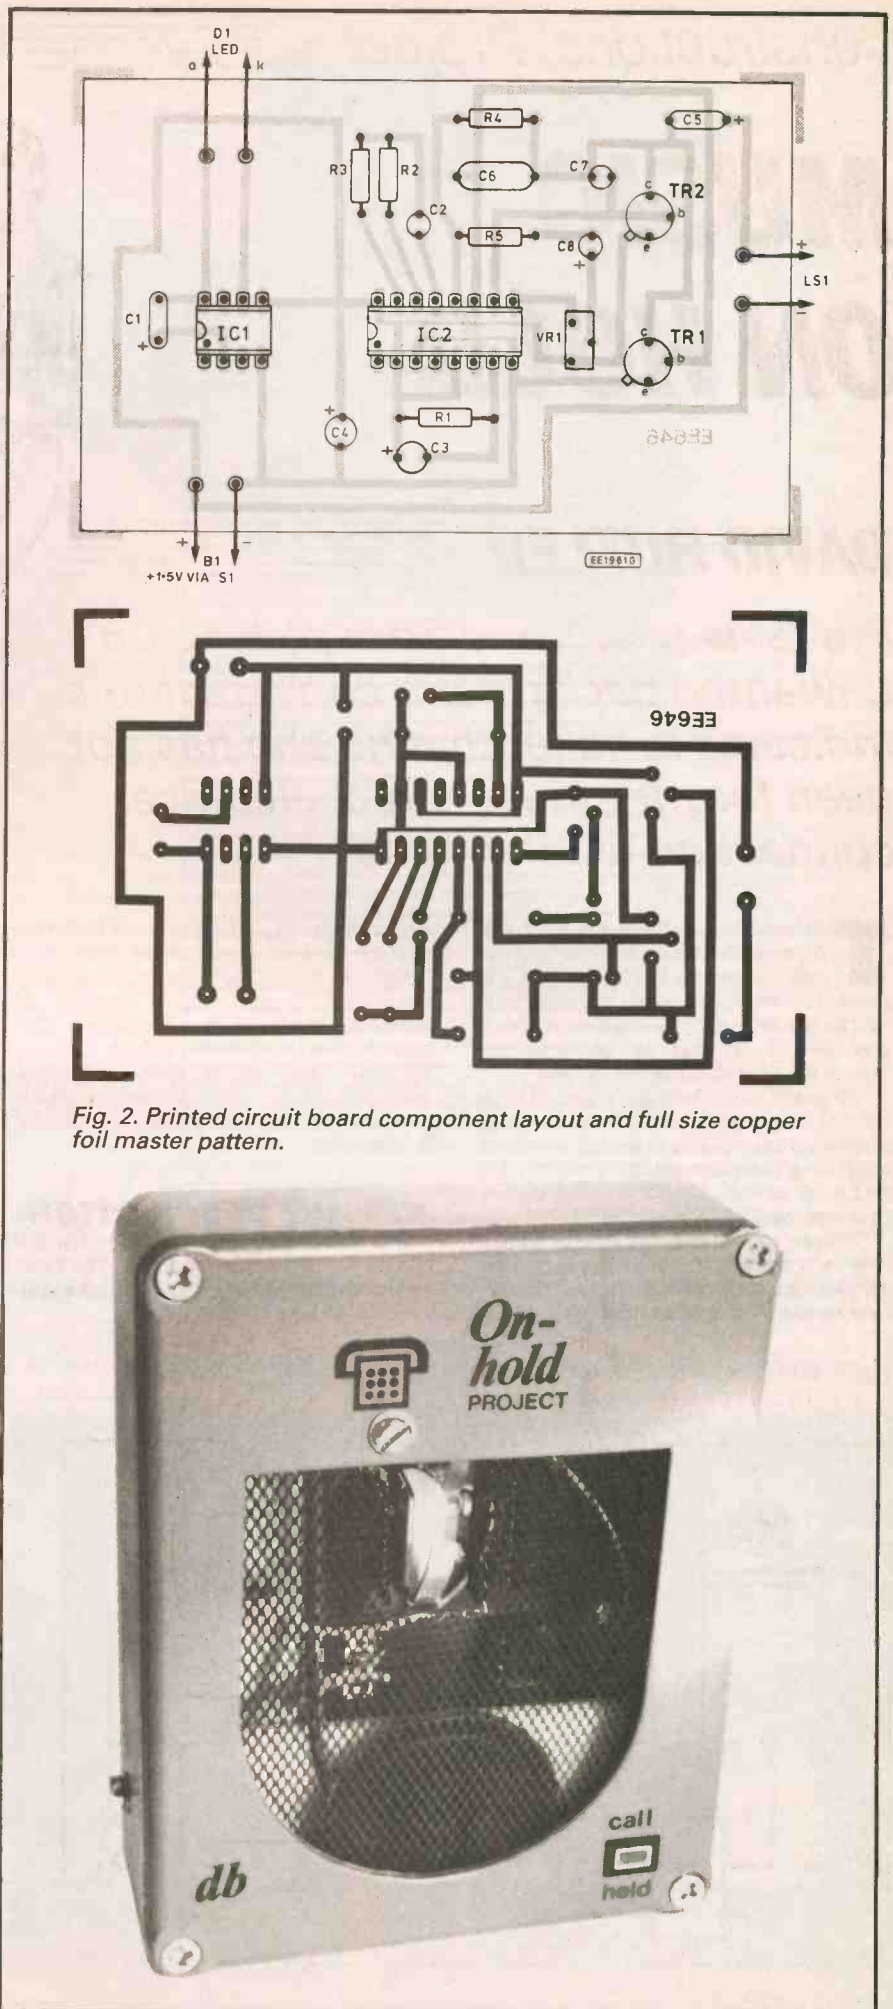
Printed circuit board component layout and full size copper foil master pattern.
